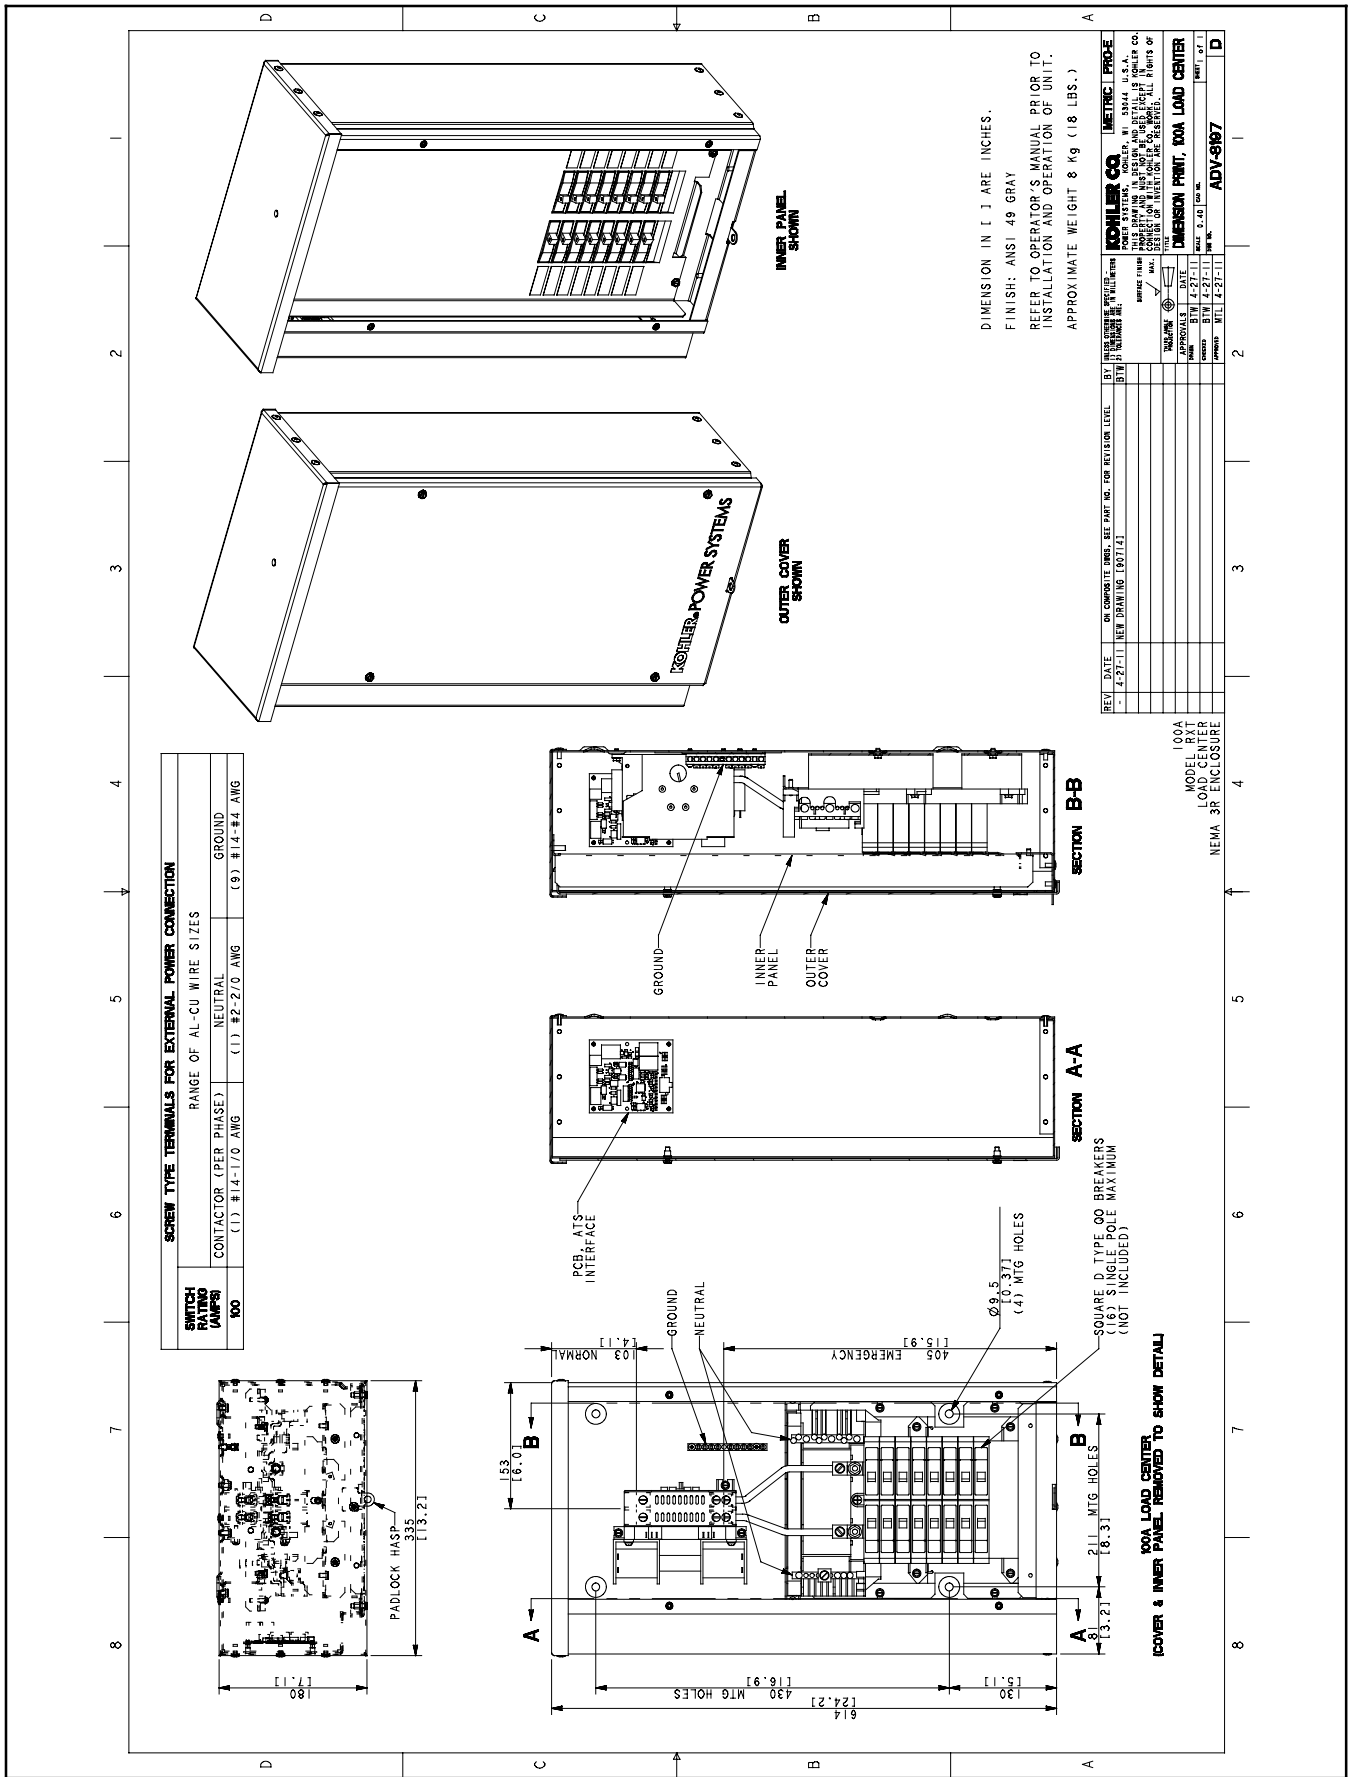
Enclosure Dimensions, 100 Amp Single-Phase with Load Center, ADV-8197
